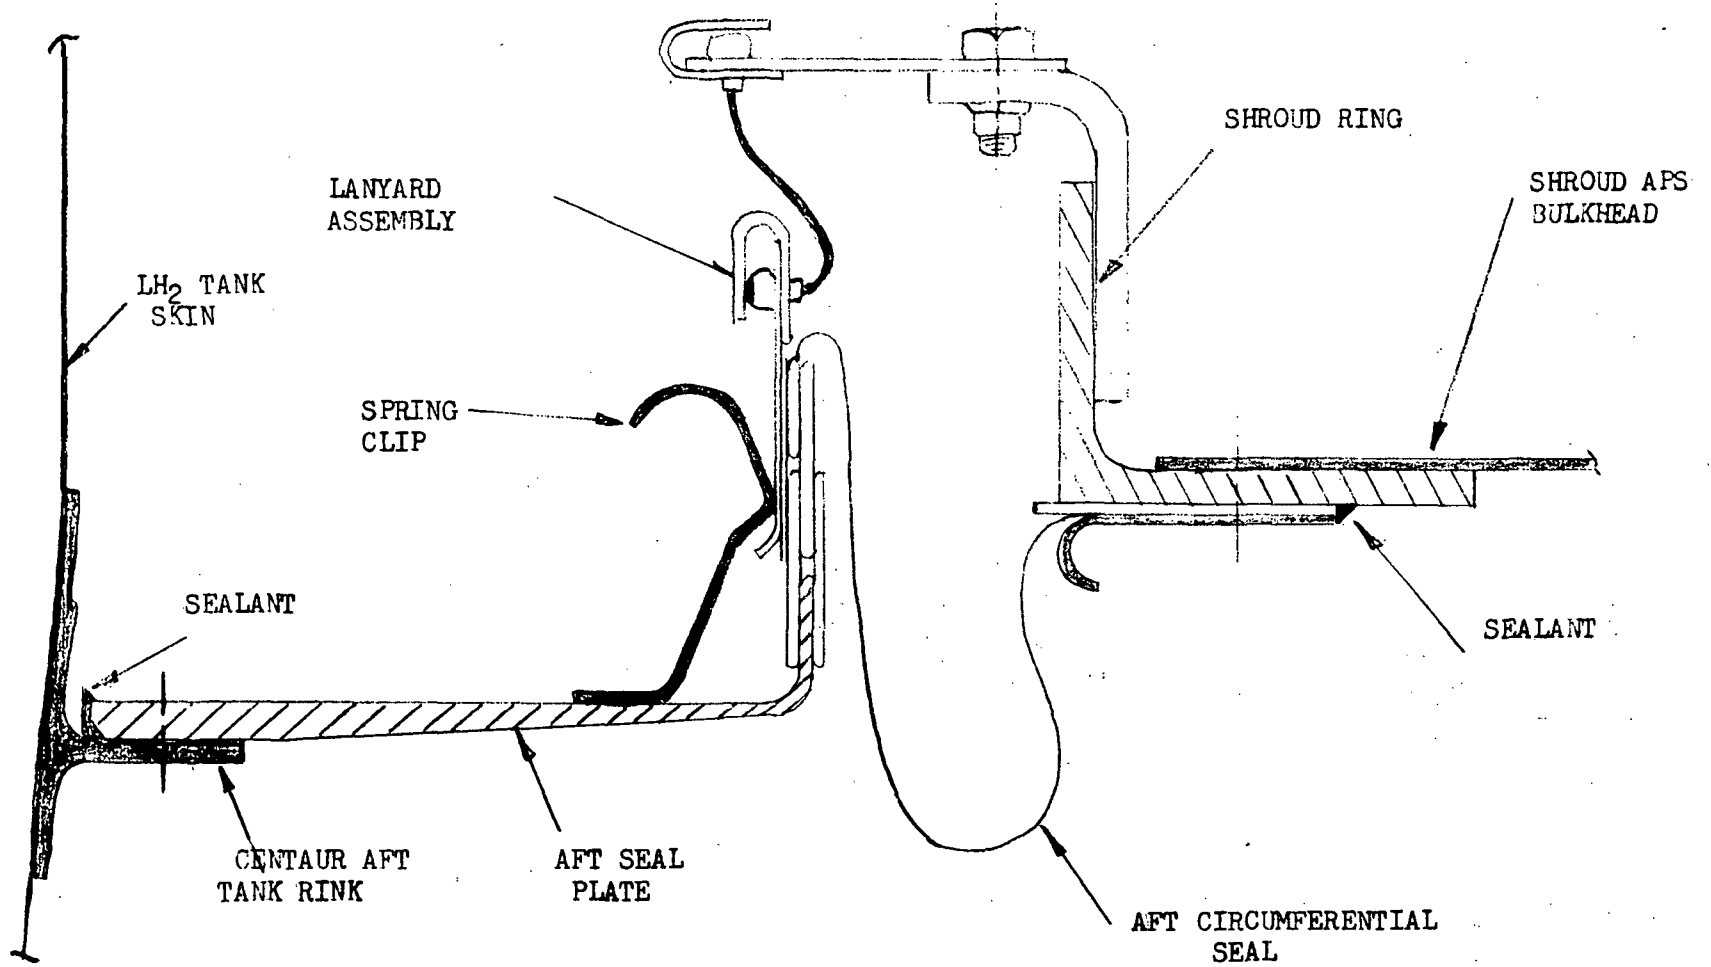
SECTION THROUGH SHROUD/CENTAUR AFT CIRCUMFERENTIAL SEAL ASSEMBLY
